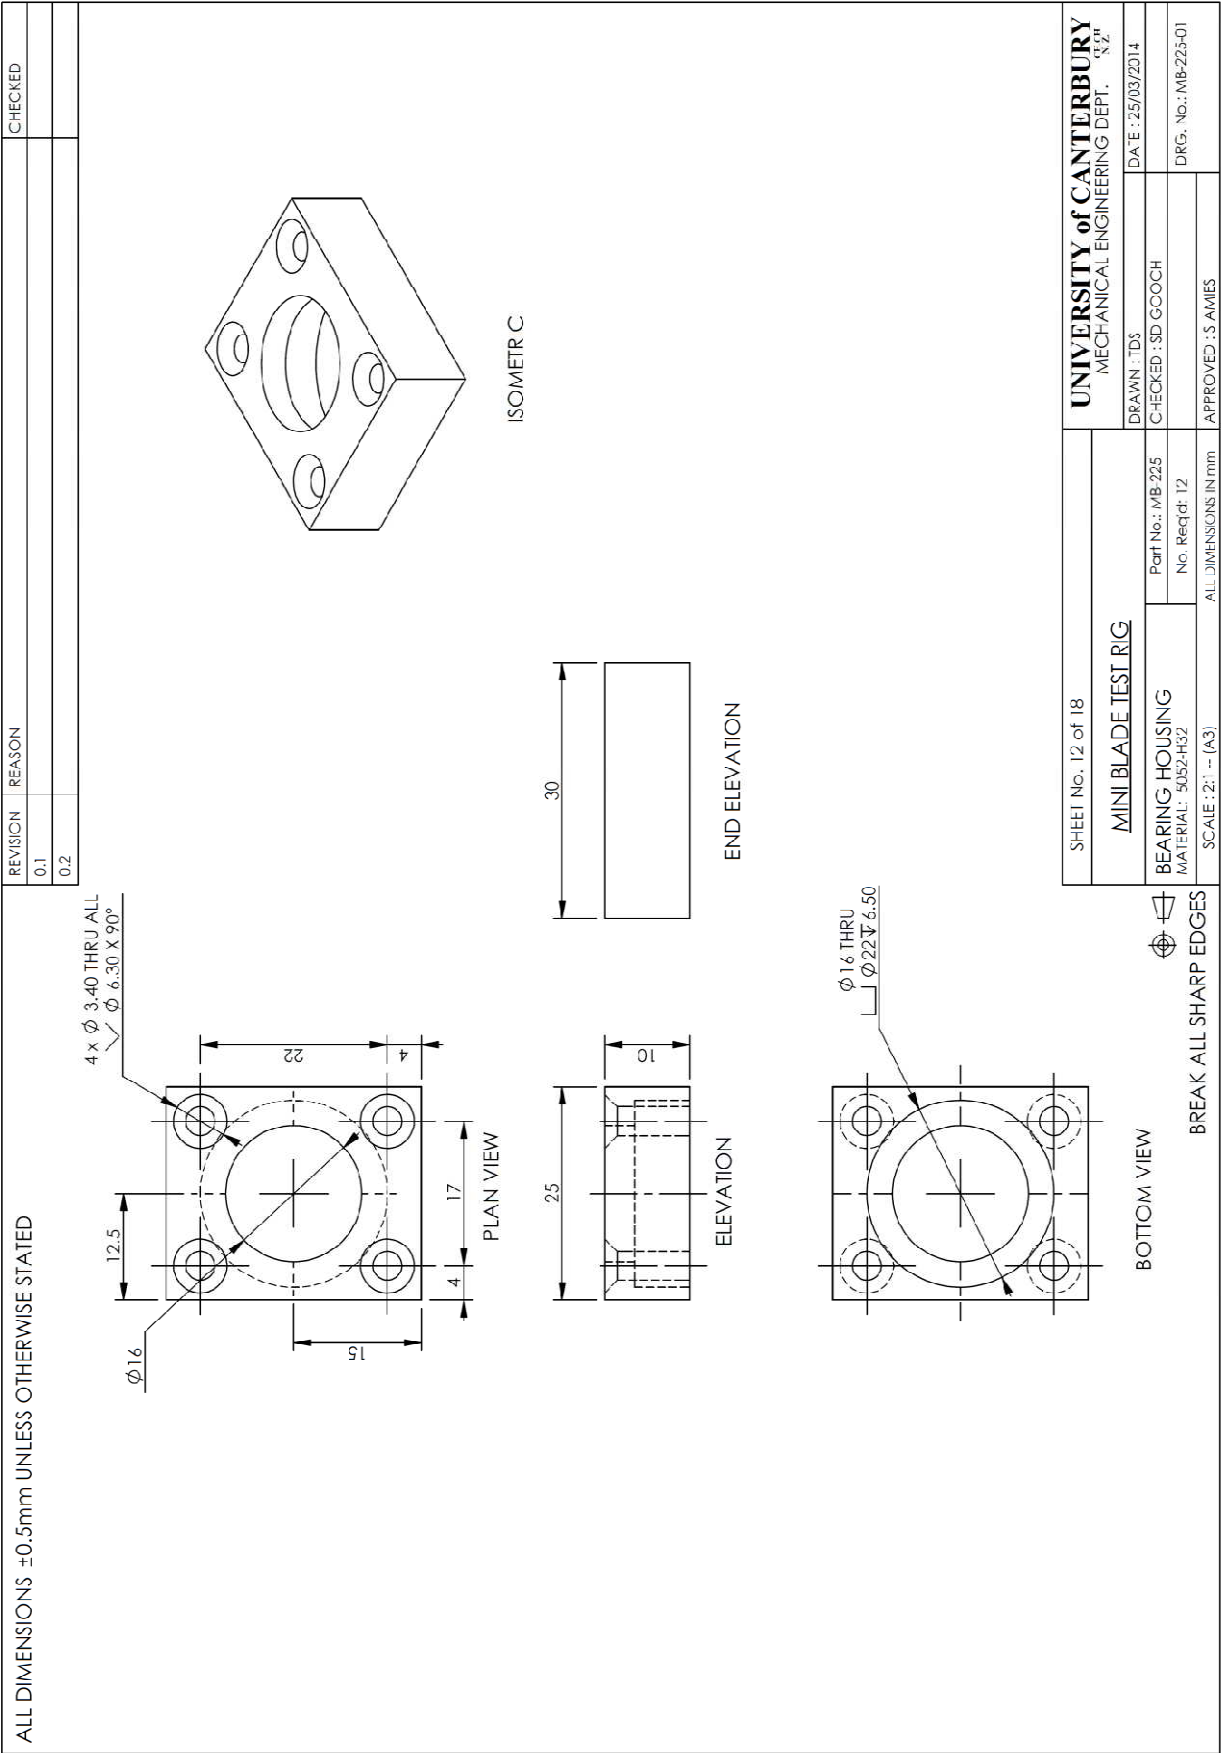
Manufacturing drawing for the generic bearing housing in variable stroke test rig.
